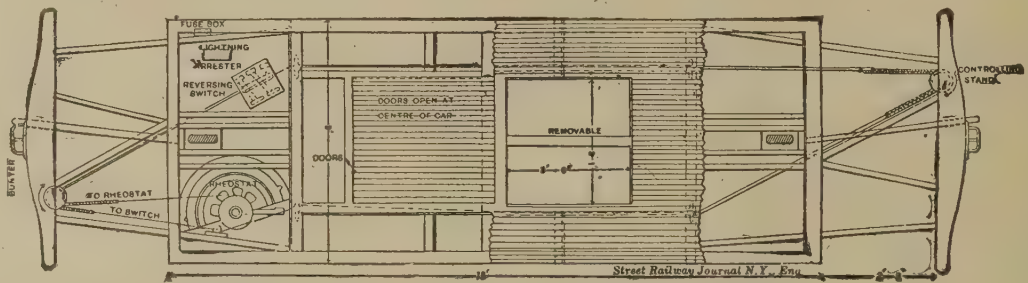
CAR PLATFORM WITH ELECTRICAL EQUIPMENT.
